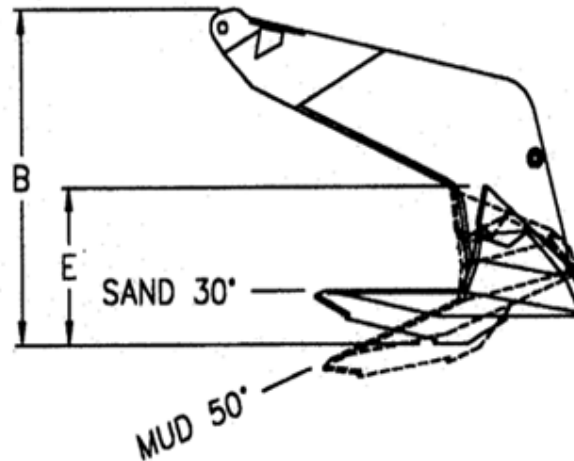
Anchor: 9-tonne Bruce® FFTS MK 4 anchor.
